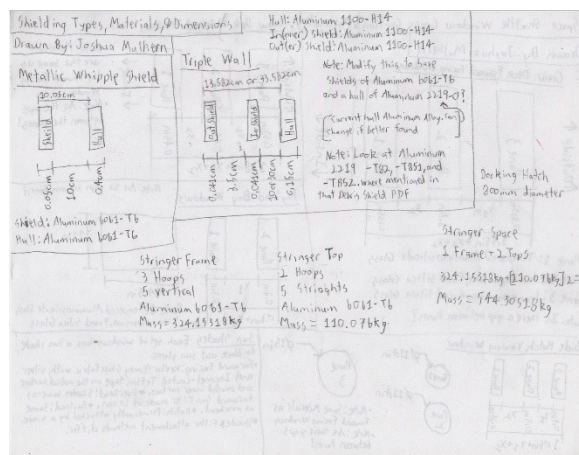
Hand Drawing Shielding types, materials, and dimensions
